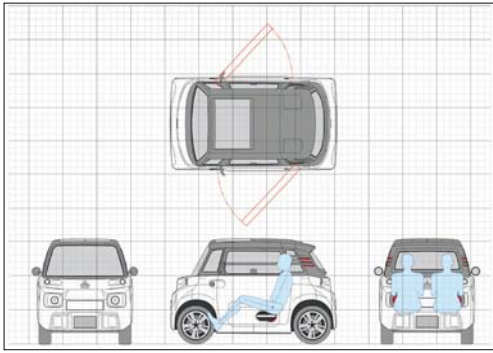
Transverse riding interior package and door opening furrows of Citroen AMI
